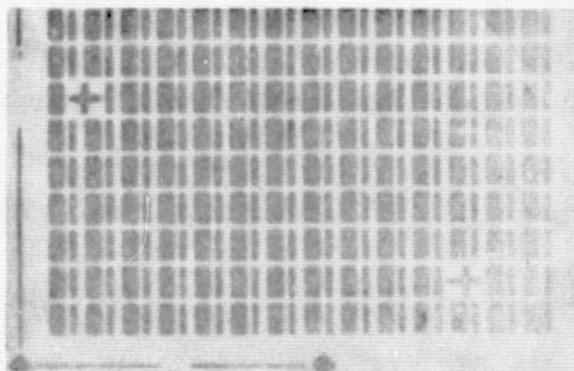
THICK FILM BONDING TEST PATTERN
